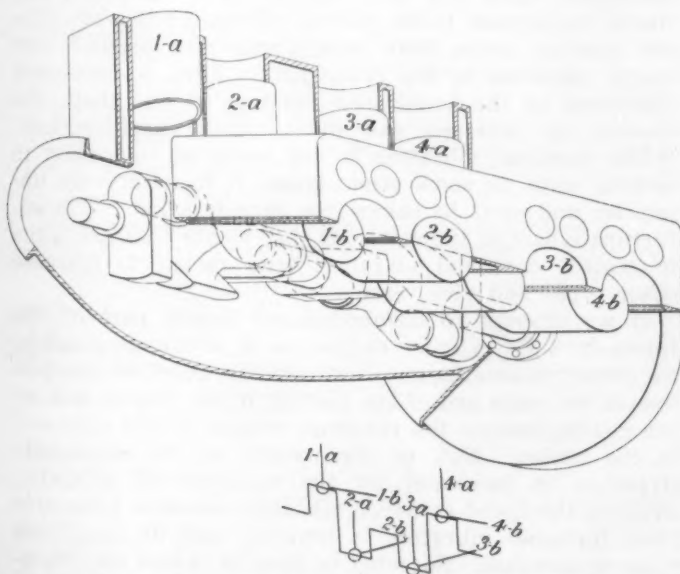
EIGHT-CYLINDER BALANCED V-TYPE ENGINE
